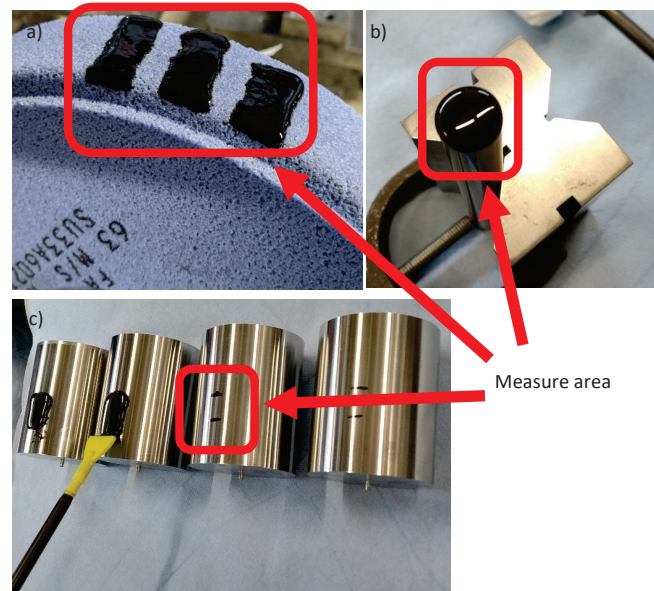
Measure items: a) grinding wheel b) FSW tool c) shafts
